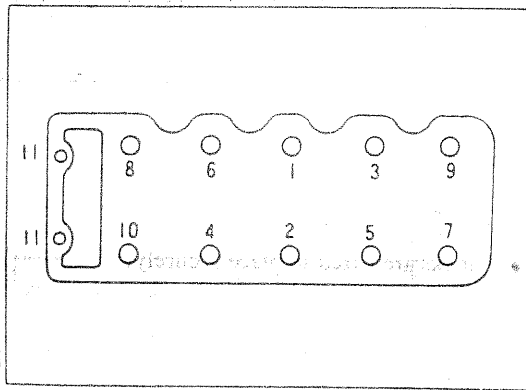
Z. Tightening Sequence of Cylinder Head Bolts
